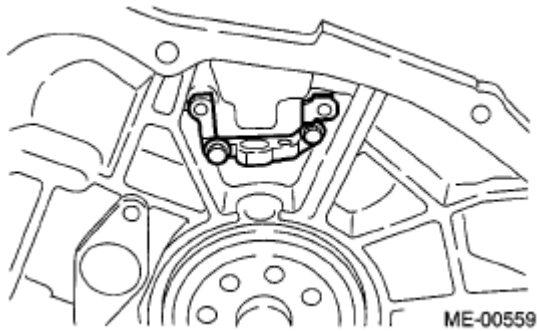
Identifying Crankshaft Position Sensor Bracket
